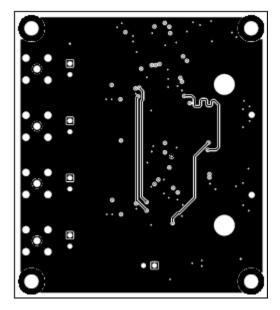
ADS7057EVM PCB Layer 4: Bottom Layer
